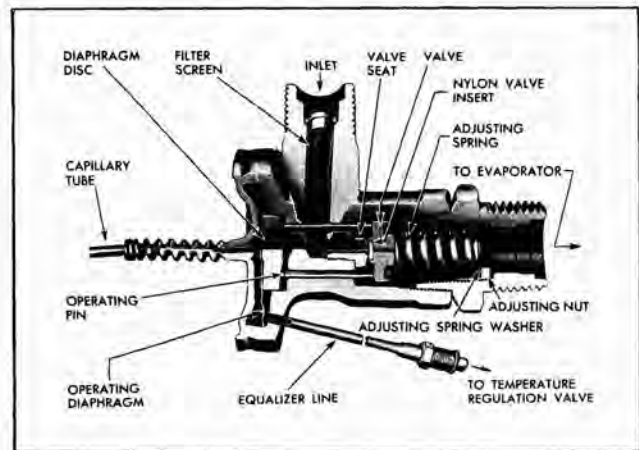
Cross Section of Thermostatic Expansion Valve
